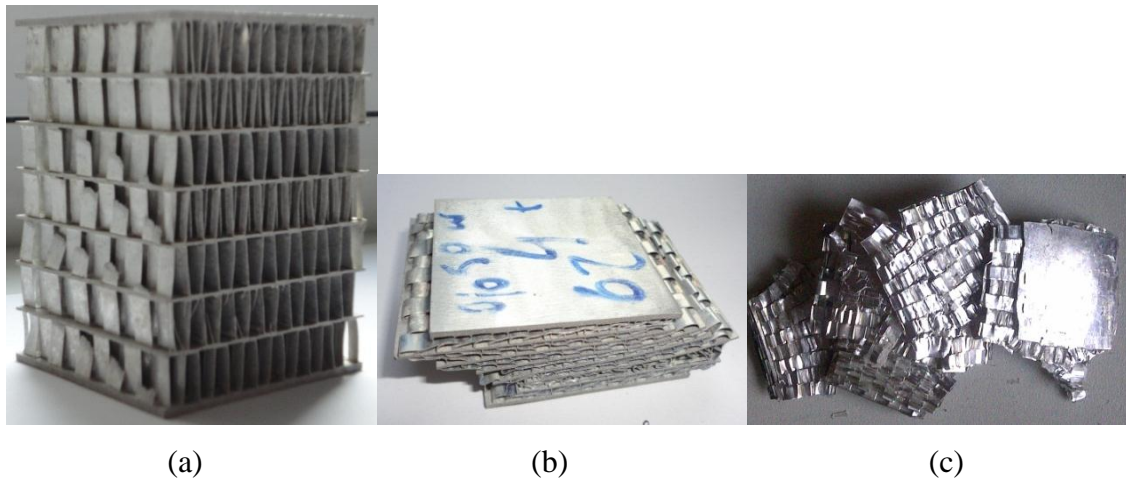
Corrugated big fin aluminum structures; (a) undeformed, (b) deformed brazed and (c) deformed epoxy bonded.
